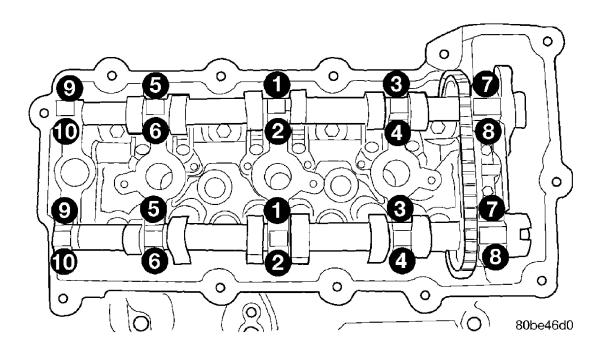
Identifying Camshaft Bearing Cap Tightening Sequence Courtesy of CHRYSLER LLC
